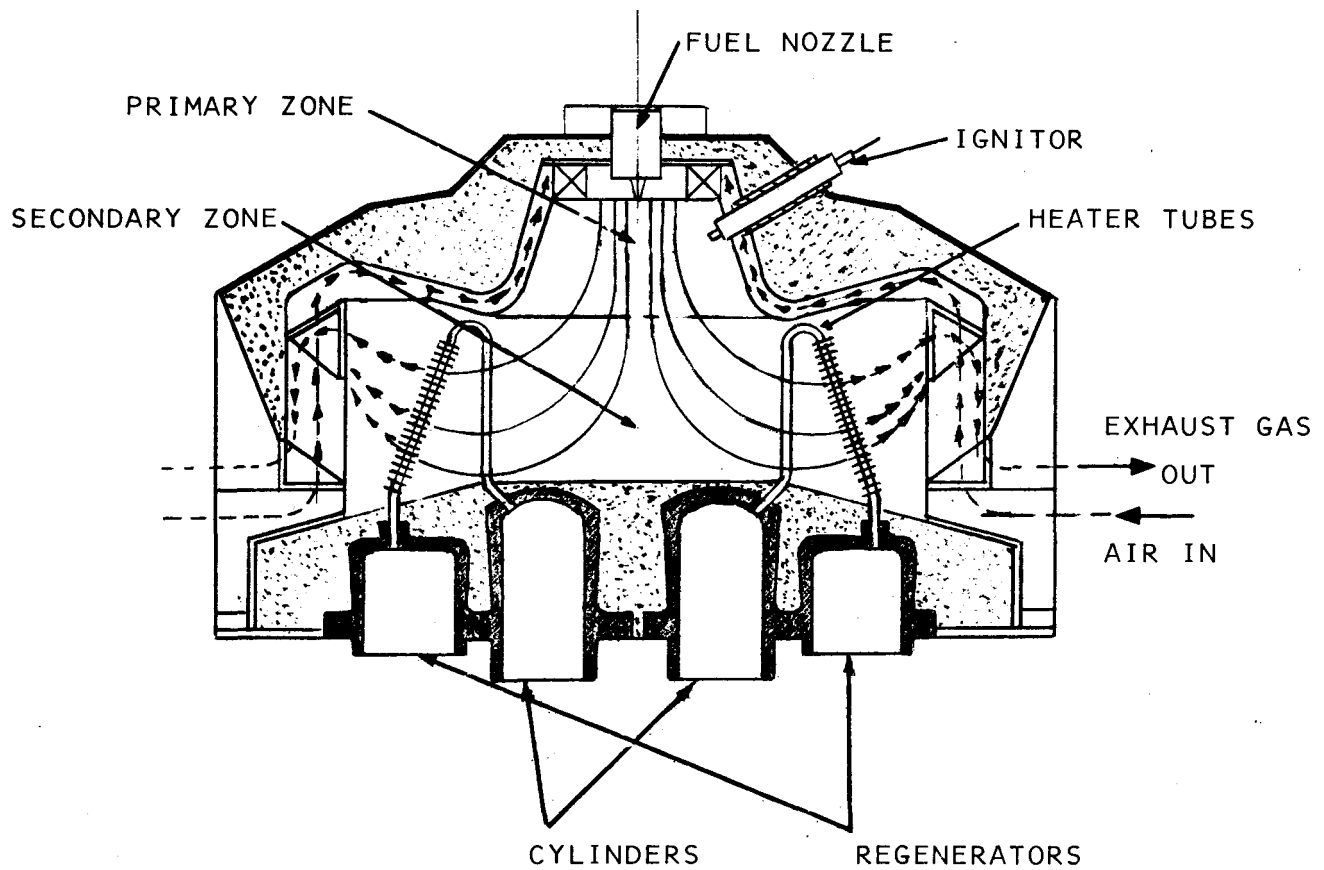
Liquid Fuel Combustion Chamber (courtesy United Stirling)
